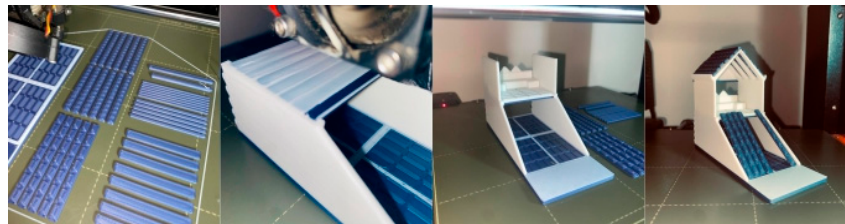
Printing process showing the printing of building elements in the first layers which are then placed to serve as support for the flat floor slab to be printed on top. In the same manner stairs, roof coverings and wall infill are also printed and mounted. Designed and printed by the author of the paper.
